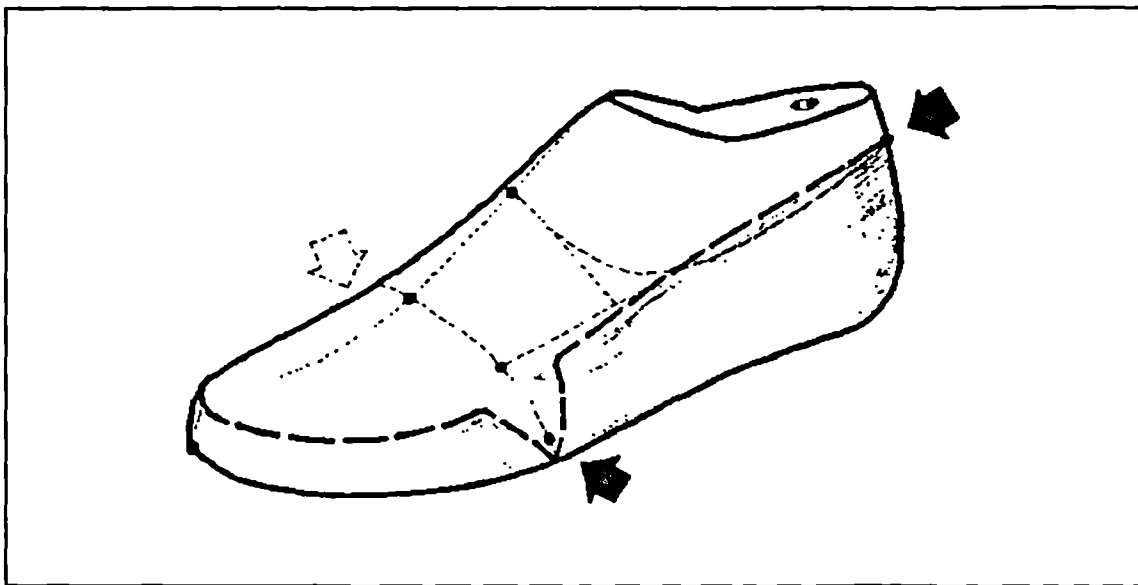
BOTTOM CUT WITH WALL AREAS KEPT AND A SPECIAL "V" SHAPED NOTCH ON THE WALL FOR FACILITATE WALKING.
